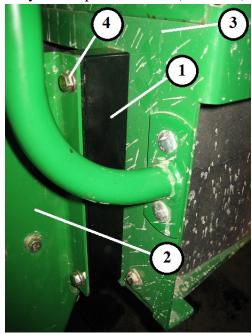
Ladder Spacer Installation Key 1 – Ladder Spacer Key 2 – Ladder Frame Key 3 – Machine Frame Key 4 – Bolt, M10x50 Flange
